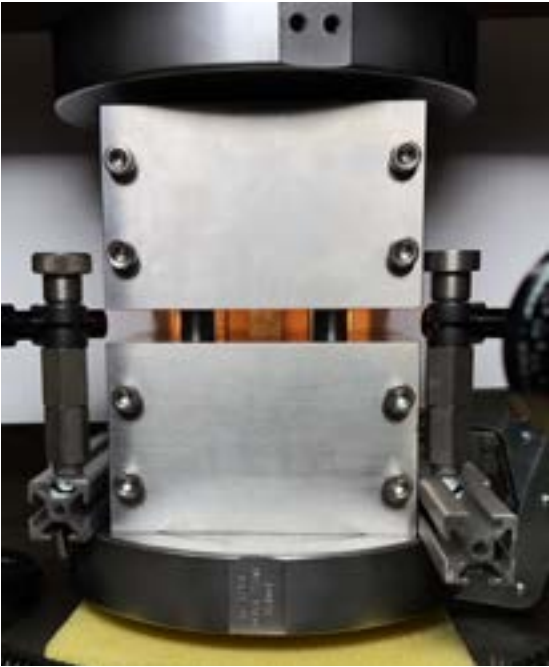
, An in-plane compression fixture holding a specimen with an illuminated DIC pattern.
